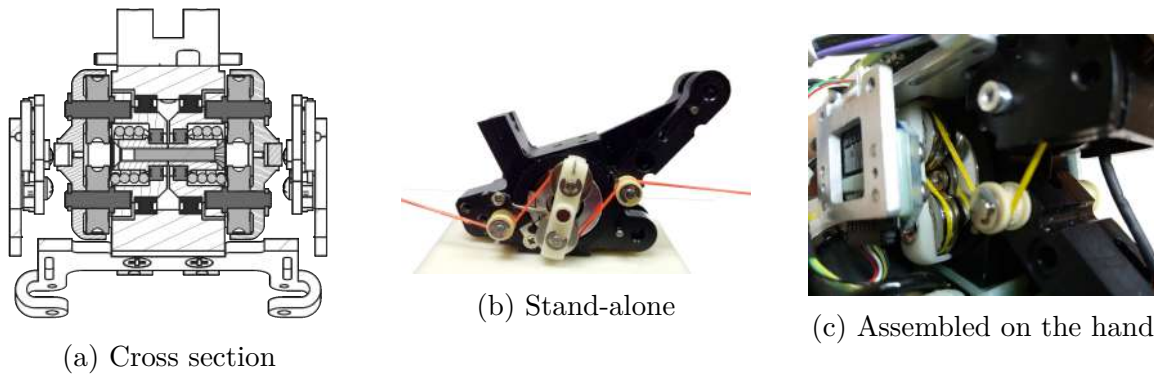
SEE module construction. Cross section (a) and prototype (b) stand-alone construction of the SEE module and (c) the module mounted on the hand.
